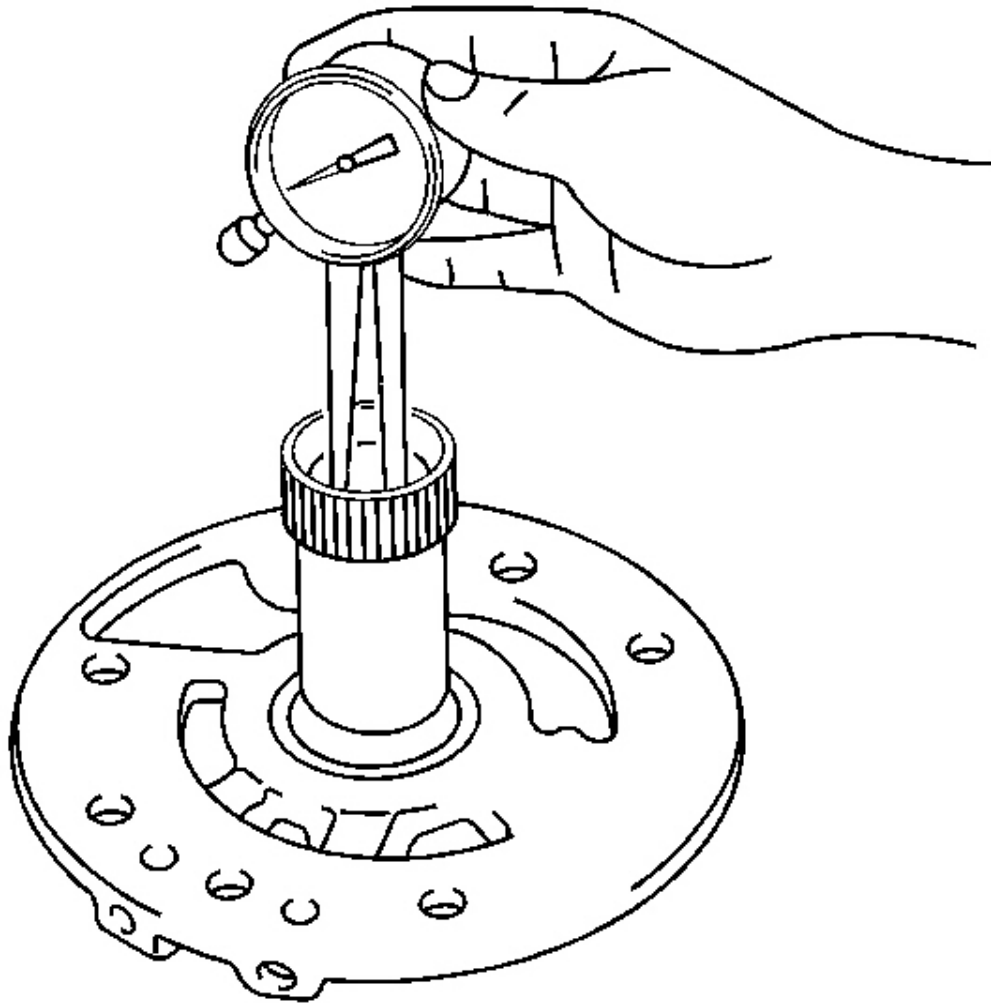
Measuring The Inside Diameter Of Stator Shaft Bushings Using A Dial Indicator
